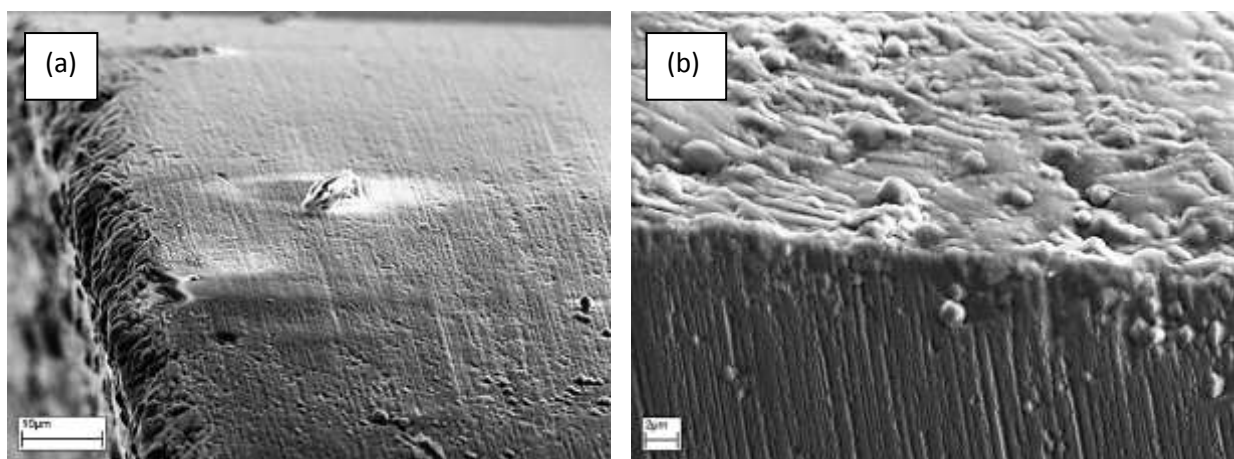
Flank/tip of insert coated rake face up (a) Flank and cutting edge at X5000 magnification (b) Flank and leading edge at X10K magnification
